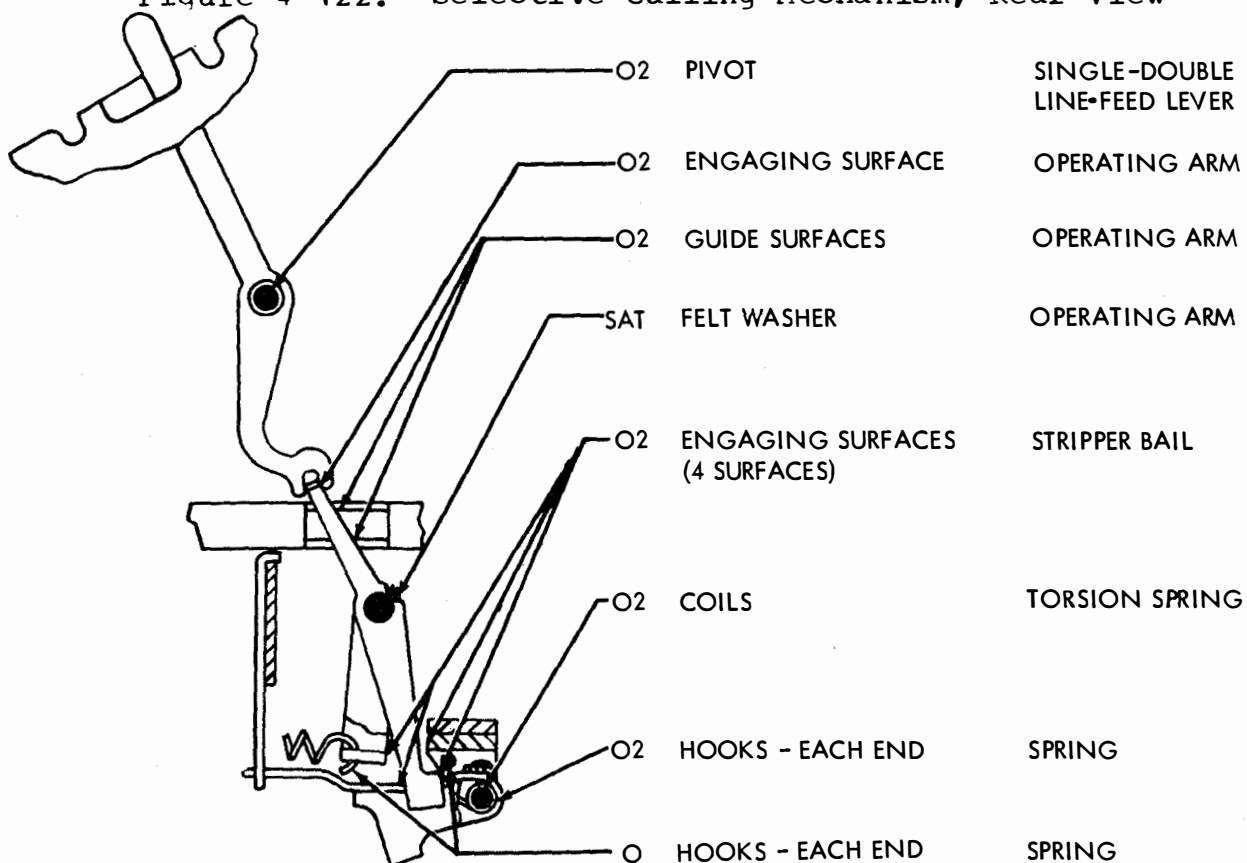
Single-Double Line-Feed Mechanism, Right Side View
